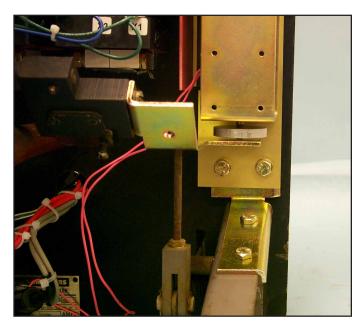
DTA Assembly Mounted to the DTA Mounting Bracket.
